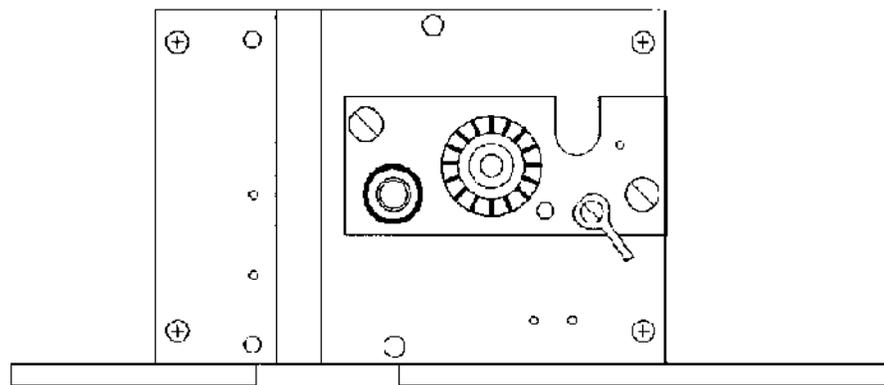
Chuck Holder Plate Mounted in LINEAR Position
